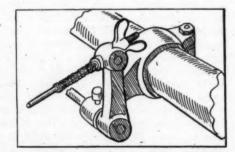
Modern form of brake adjustment which may be installed with spare parts
